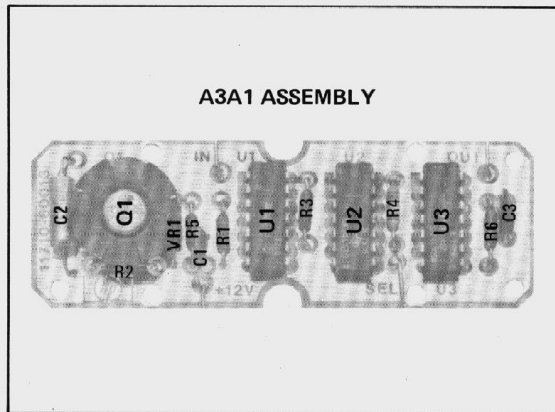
A3A1 50 MHz Divider Board Assembly Component Locations
